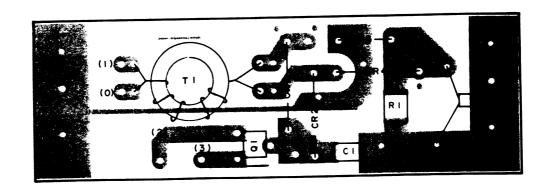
A51 Probe I-Channel Board Assembly Component Locations.
